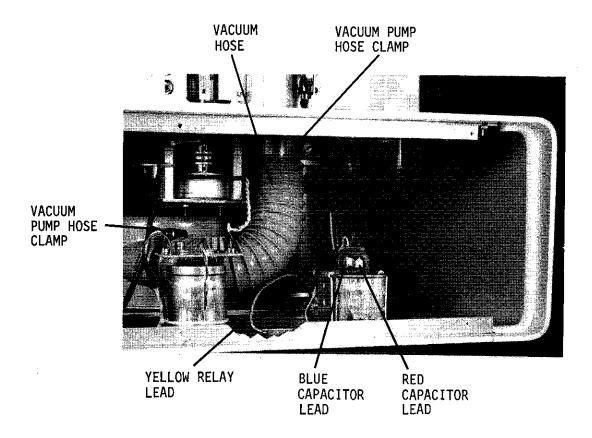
Disconnecting Vacuum Blower Motor Assembly
